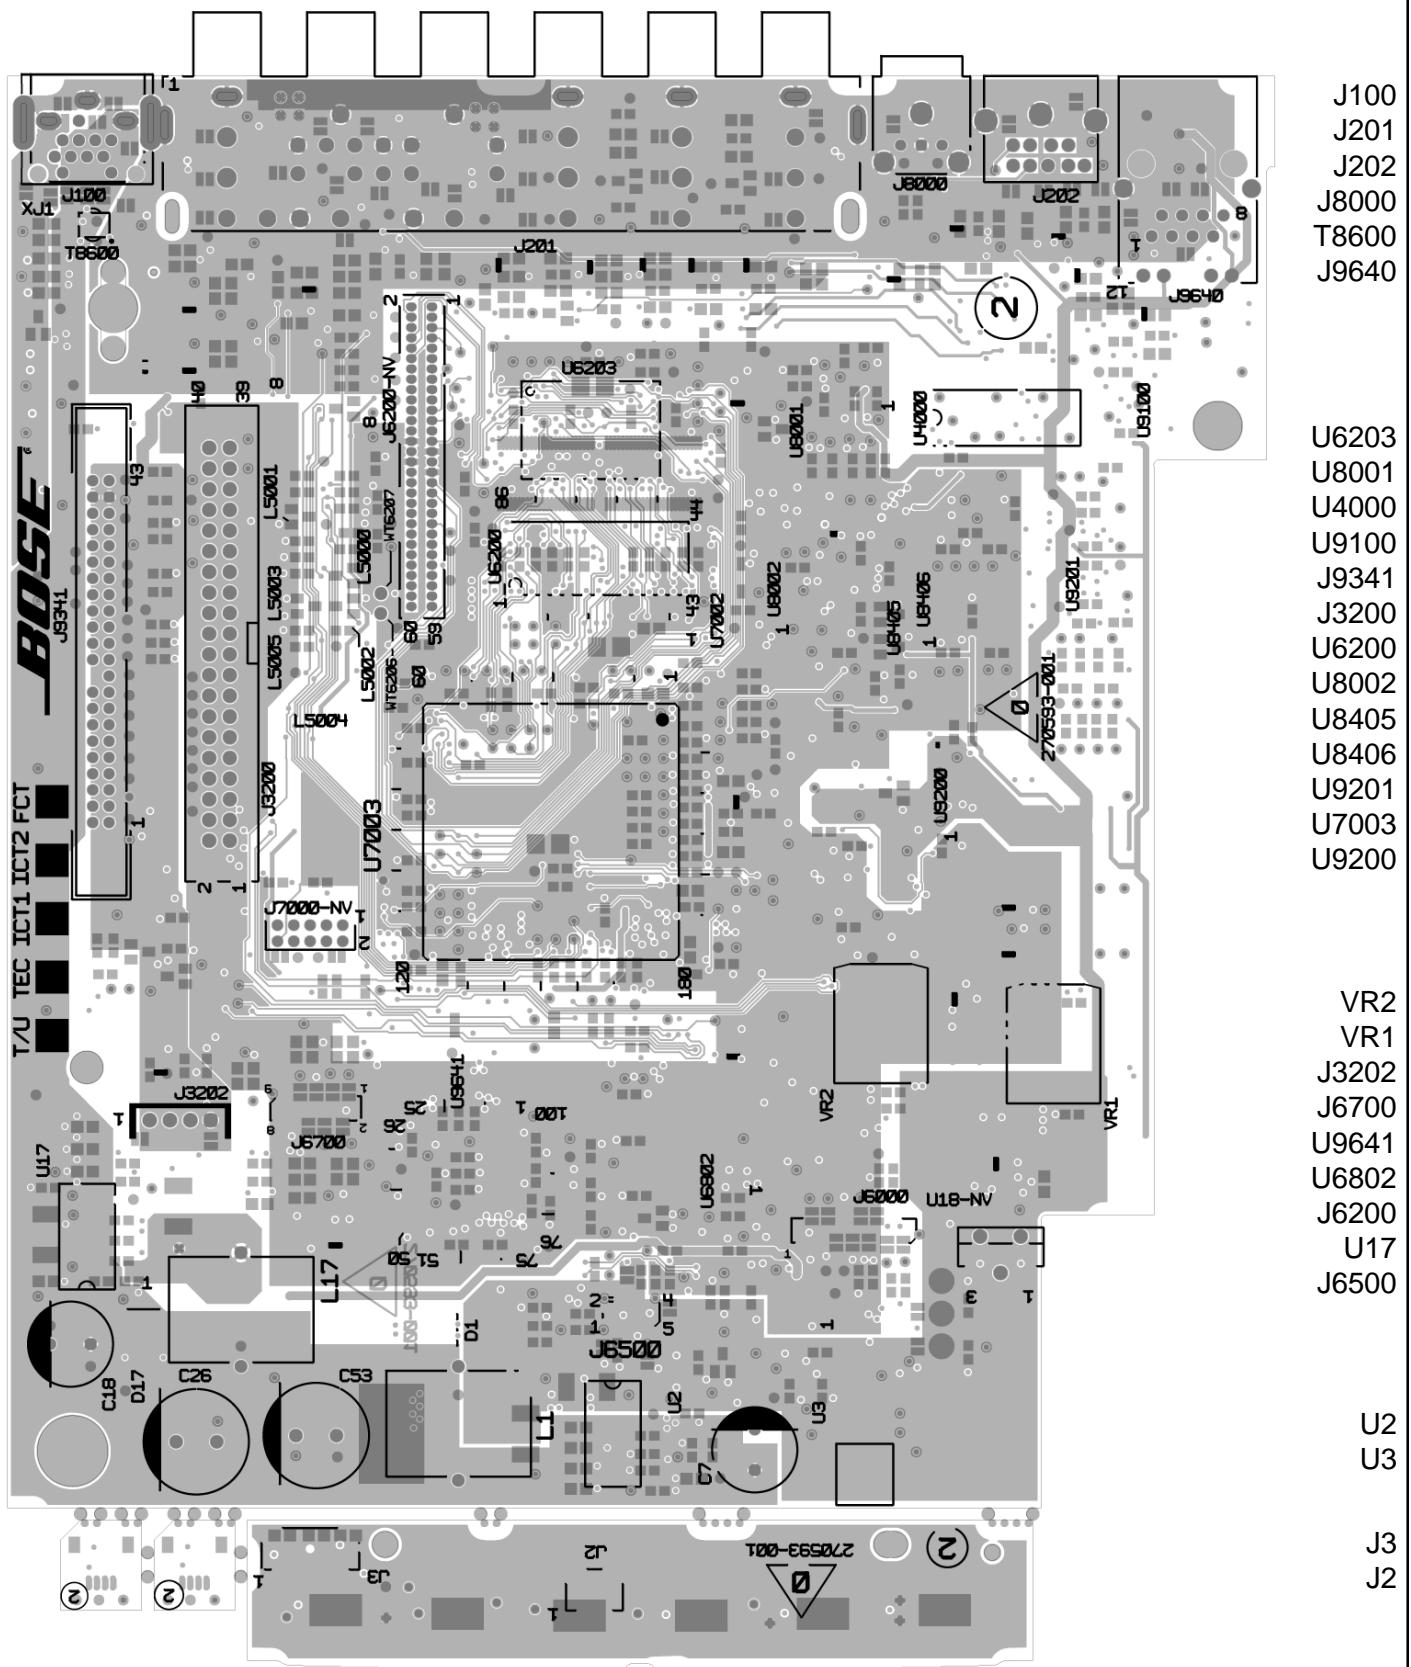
Console Main PCB Layer 3 Power Plane Layout Diagram
